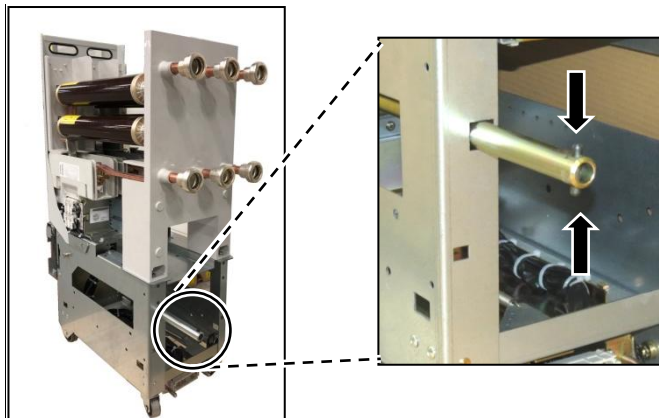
Coupling pin of the operating shaft at the contactor truck
